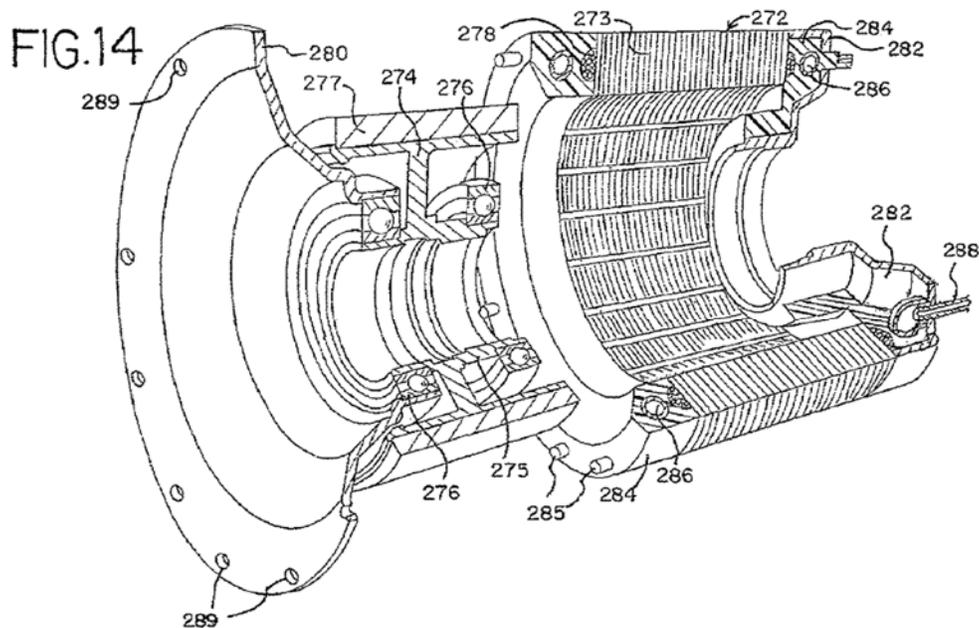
depicts an exploded partial cross section view of motor/generator 270. *See Ex. 1001, 4:29–31, 4:34–35.* Motor/generator 270 includes stator assembly 272 and rotor 274 rotatably mounted to stator assembly 272 with bearings 276. *See id.* at 15:51–54. Stator assembly 272 is made of steel laminated core 273 and windings 278. *See id.* at 15:51–59. Windings 278 and the laminations making core 273 are substantially encapsulated by
